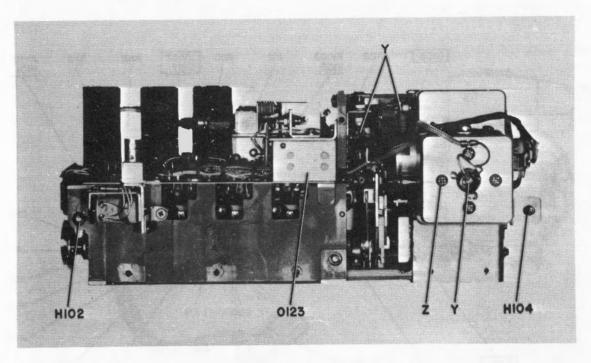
RF and PA Amplifier Assembly, Right Side, Disassembly Points
